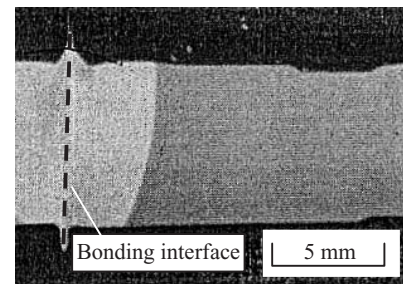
Macrostructure of longitudinal section of the steel after upset welding
